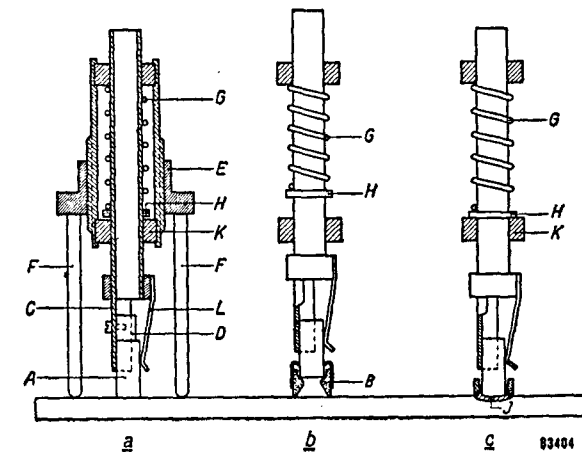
Diagram to demonstrate the operation of the welding gun.
